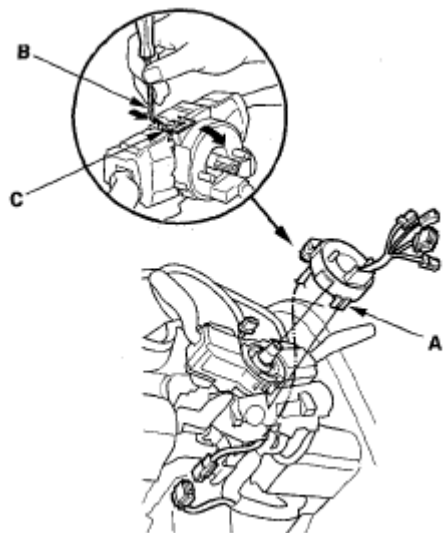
Releasing Lock Tab Under Cable Reel Connector With Hook Shaped Tool
